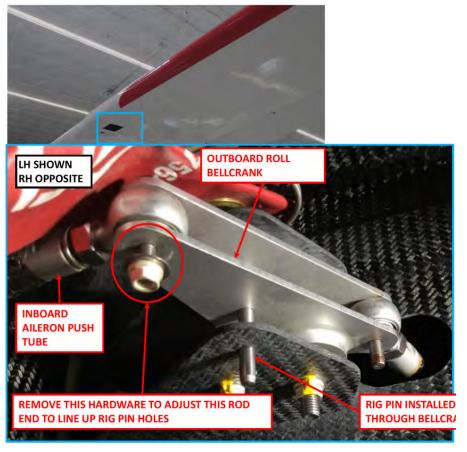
OUTBOARD ROLL BELLCRANK RIG PIN
